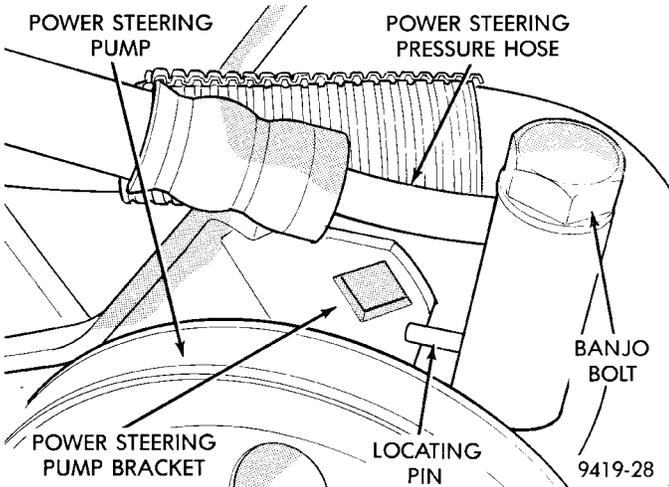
Pressure Hose Attachment To Power Steering Pump
